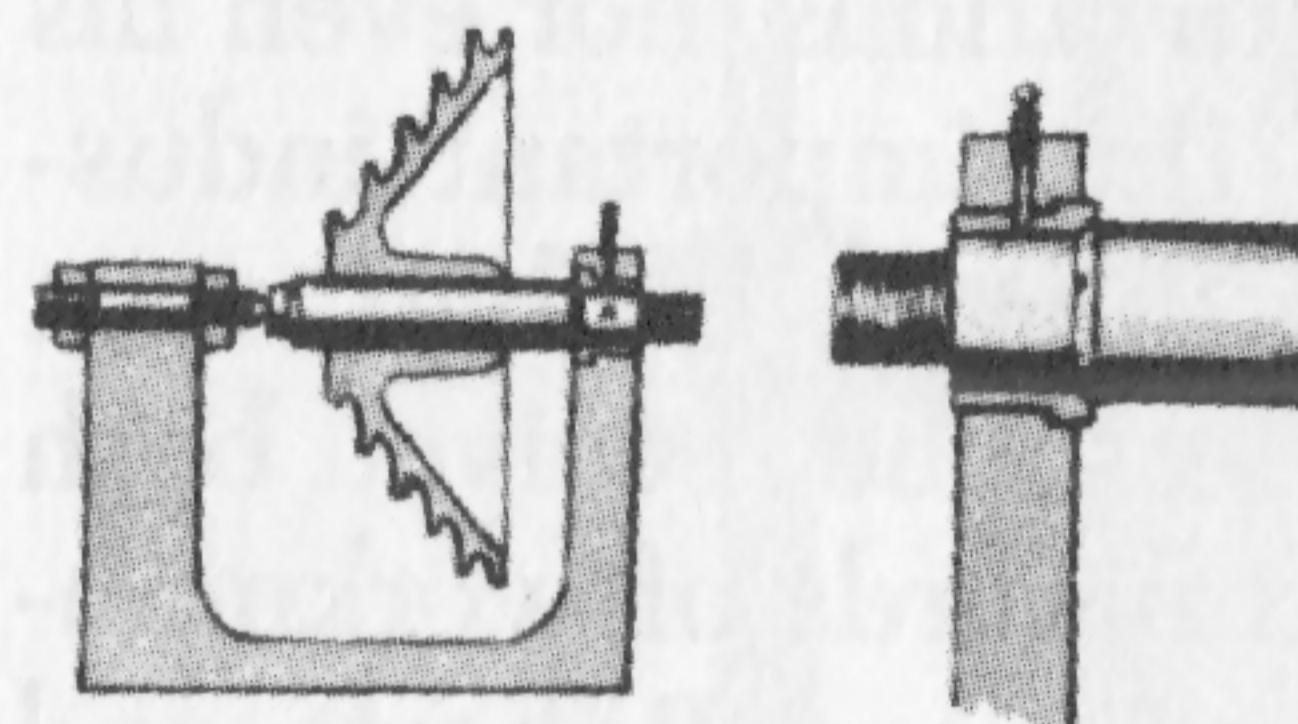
MAUDSLAY'S IMPROVED SPINDLE BEARINGS, CA. 1800.
